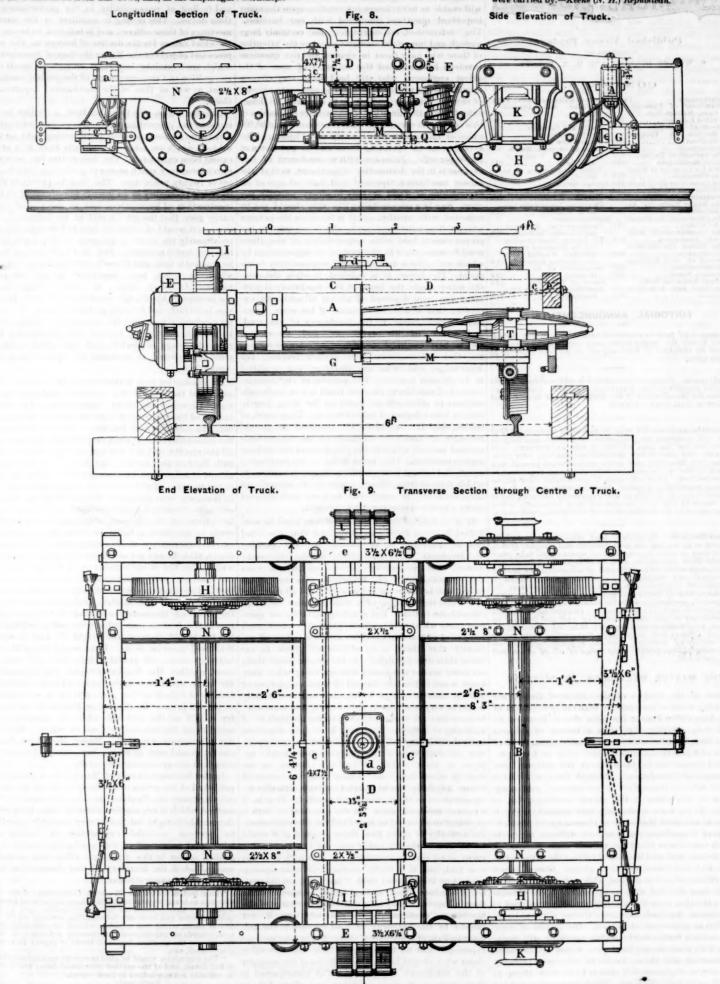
Plan of Truck. TRUCK OF PASSENGER CARS OF METROPOLITAN ELEVATED RAILROAD.
